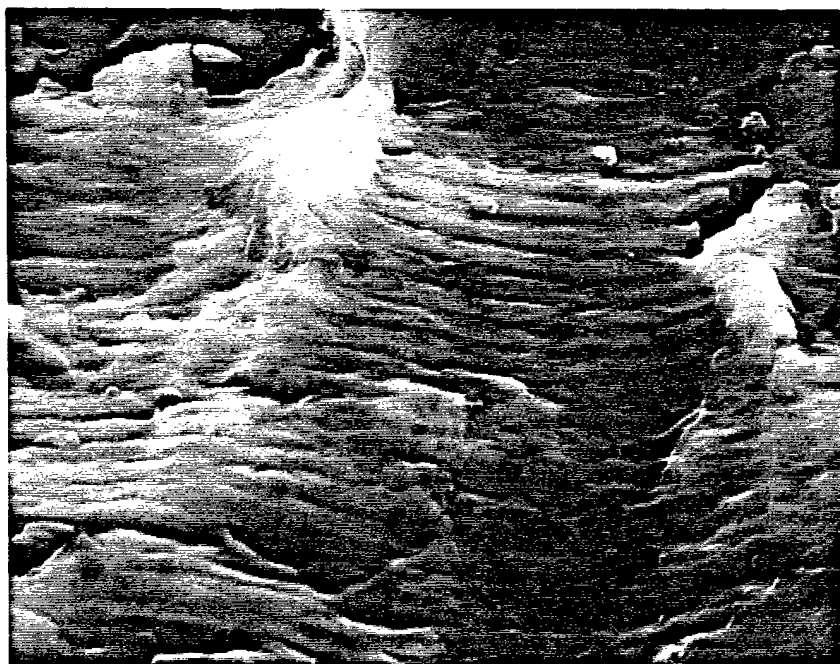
Striations Noted Within the Fracture Surface of PUR Rod -174 (Mag. 10kx).
